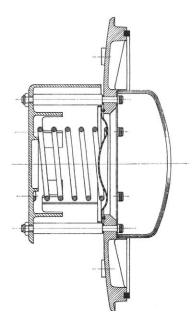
Typical engine crankcase explosion relief valve Courtesy of Pyropress Engineering Co Ltd
